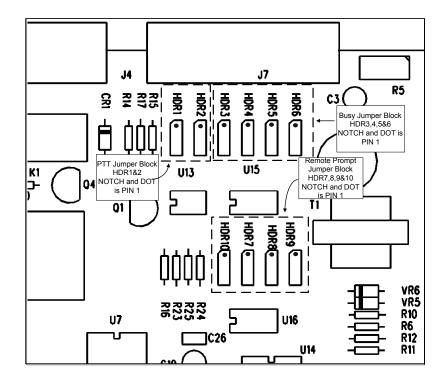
Expanded Jumper Section - TimeBurst PCB layout
